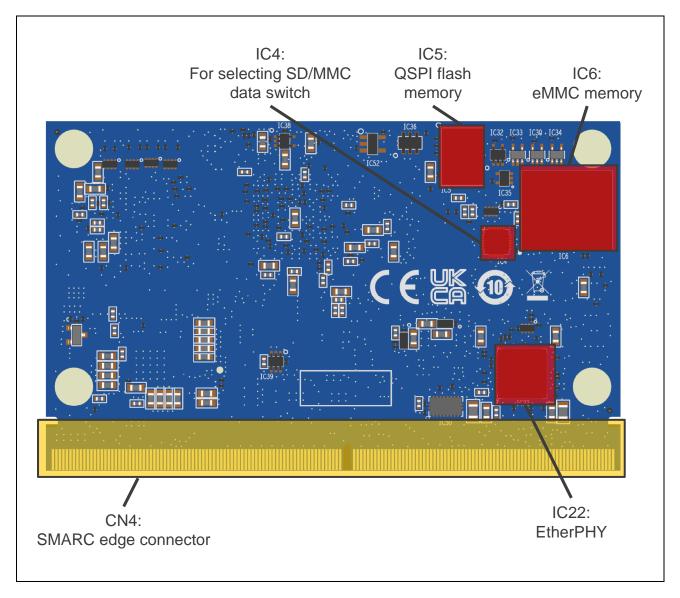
Layout of Components of the RTK9744L23C01000BE (Bottom View)
